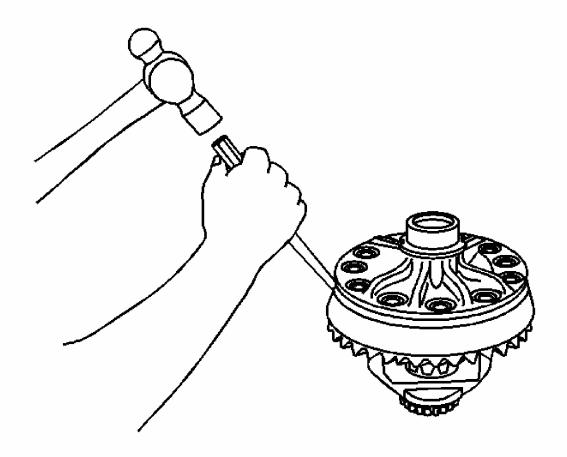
Removing Ring Gear From Differential Courtesy of GENERAL MOTORS CORP.
